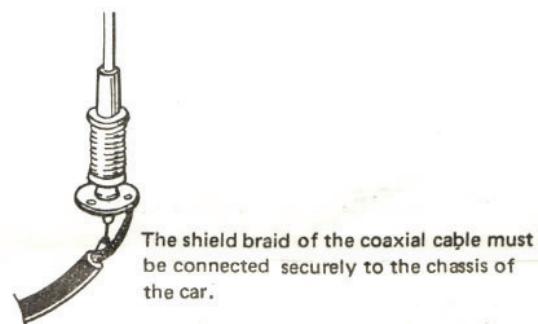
Connection of Coaxial Cable to Bumper Mount
